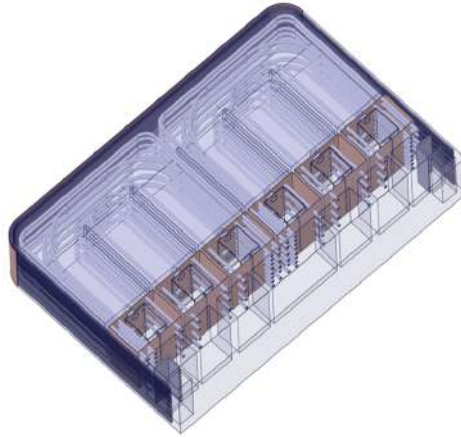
WCLL BU: perspective view of the Outboard breeding unit, showing the inner cooling pipes layout.
